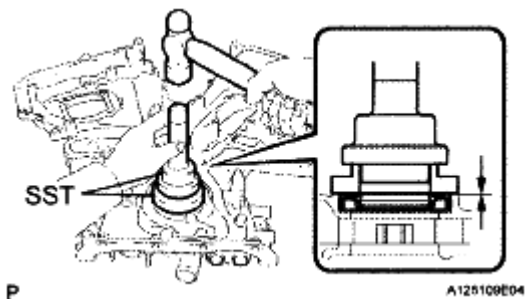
Using SST To Install Timing Chain Case Oil Seal
